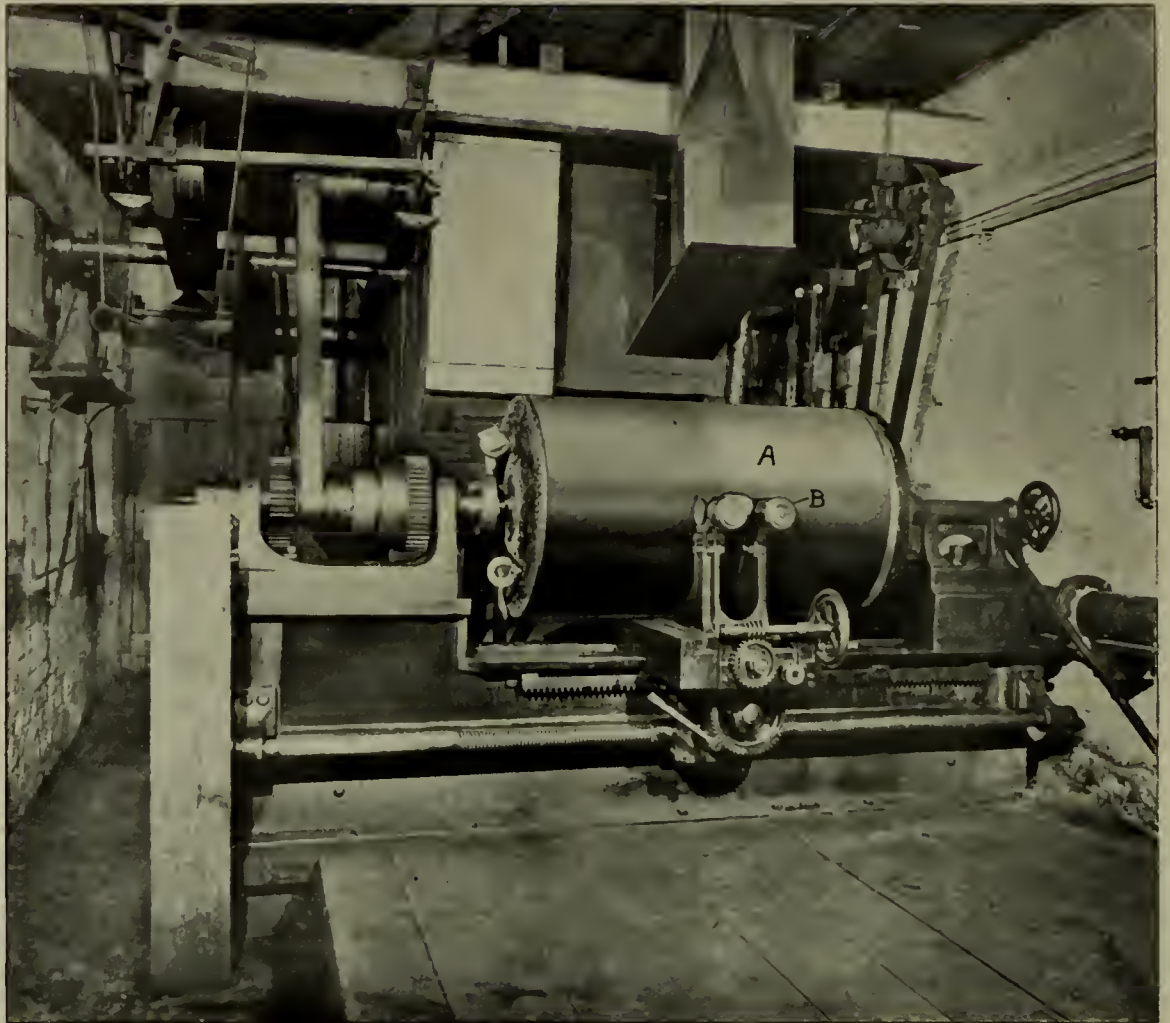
MACHINE FOR EXPANDING OFF LARGE COPPER CYLINDERS
